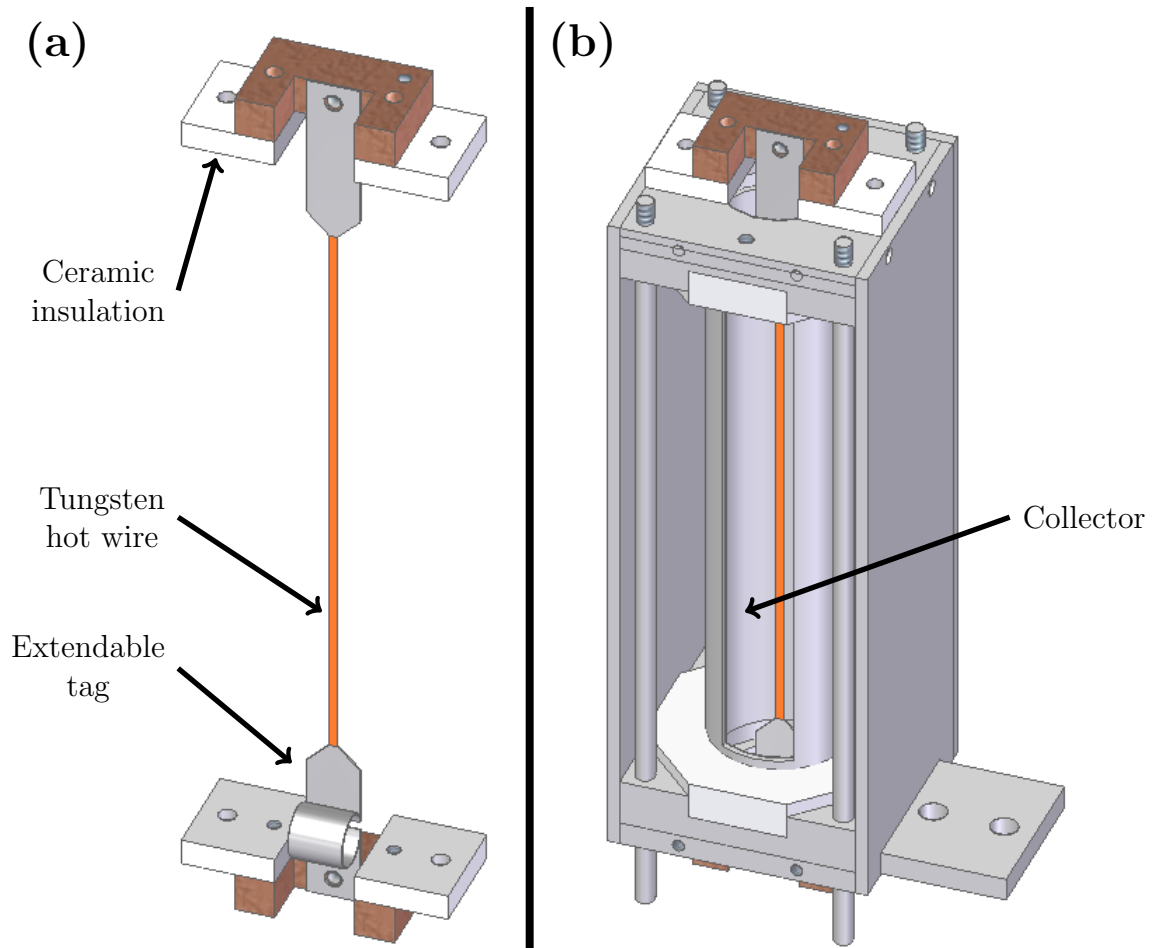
(a) Bare tungsten hot wire and (b) the fully assembled surface ionization detector. The tungsten hot wire is spot welded onto two molybdenum tags, one of which is extendable to sustain any change in strain resulting from the thermal expansion of the hot wire. The hot wire is encased in a cylindrical stainless steel collector with a rectangular opening in the front to allow the atomic beam to impinge on the hot wire. Three copper clamps (not shown) are attached to each tag and the collector to anchor wires connected to electrical feedthroughs. Custom-machined macor ceramic parts were used to isolate the hot wire and collector from the grounded frame.
